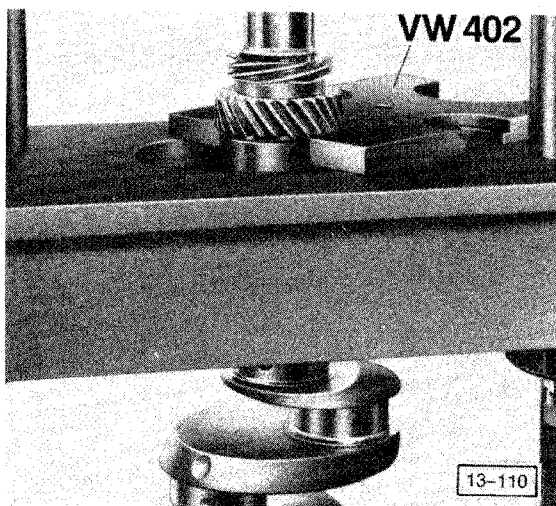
Distributor drive gear/crankshaft timing gear, removing
